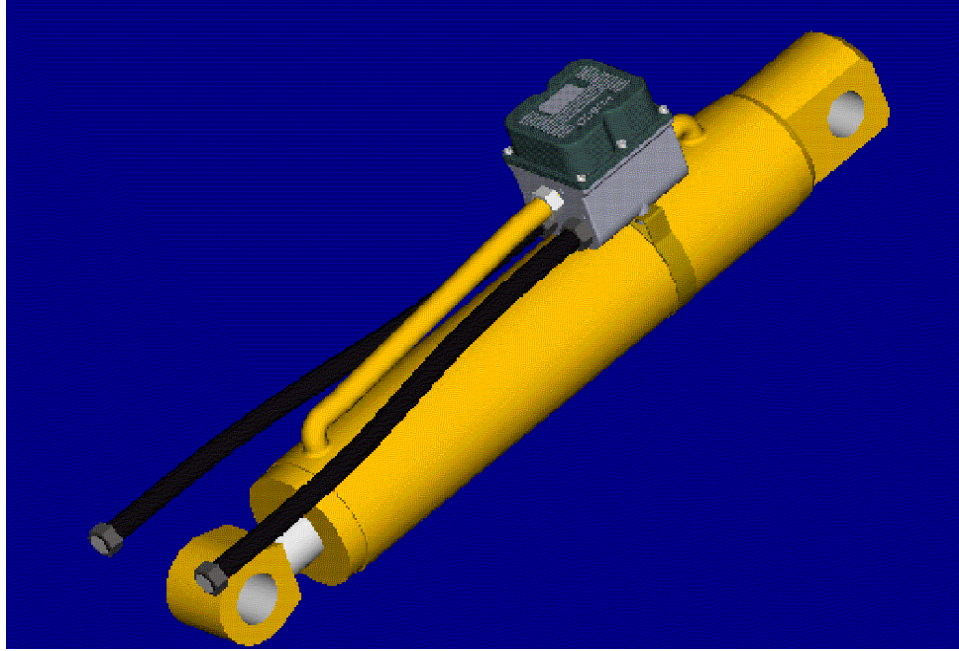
A four-valve assembly mounted directly on the cylinder it is controlling
